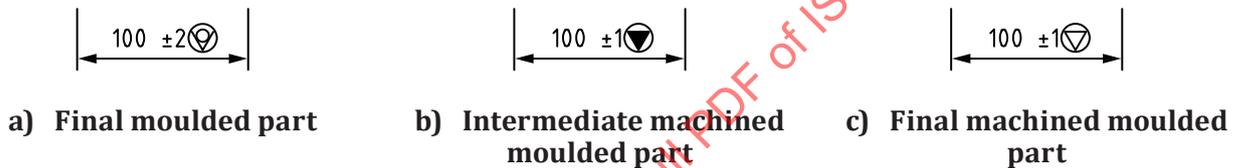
Examples of nominal dimensions with individual tolerances
